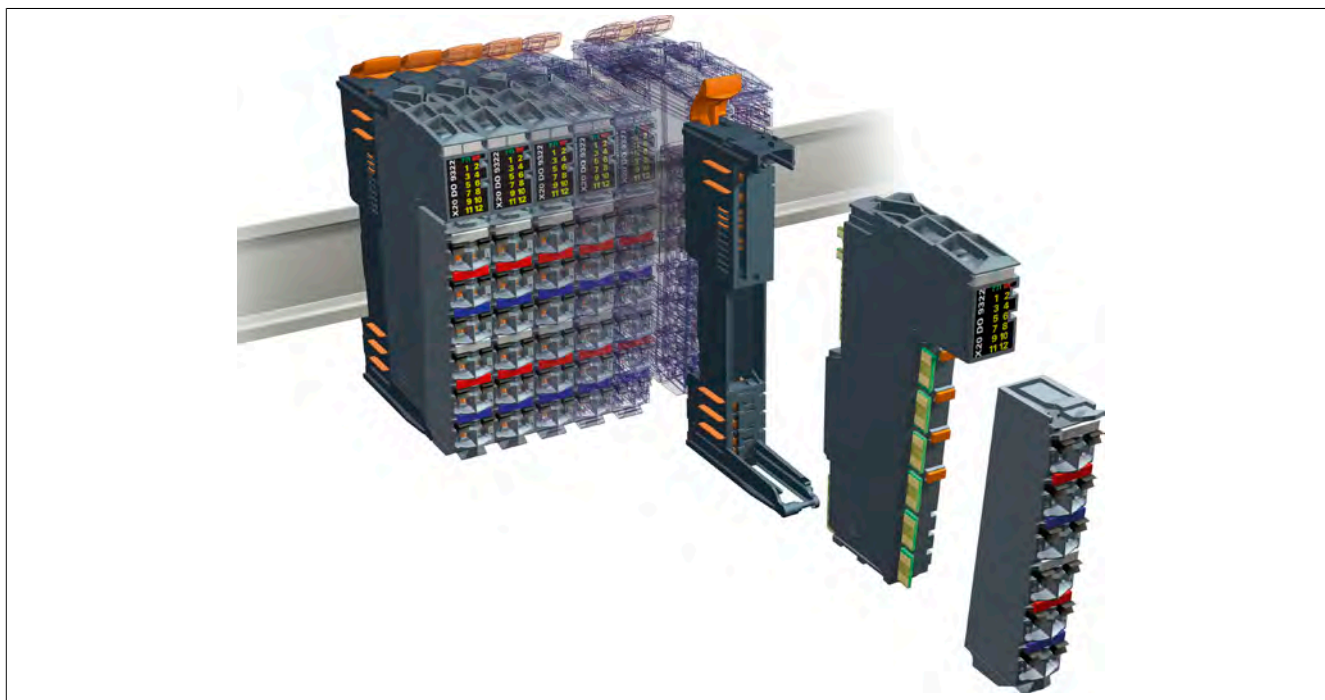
Each module consists of three basic elements: Terminal block – Electronics module – Bus module
